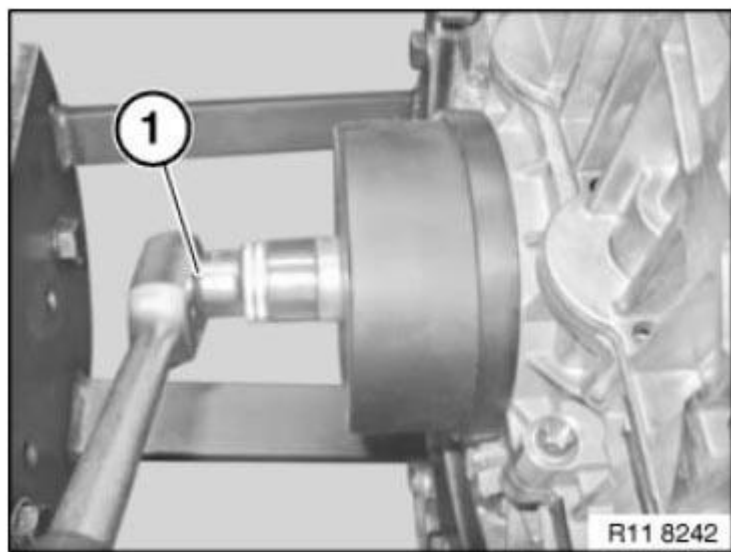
Screwing On Radial Shaft Seal Using Special Tool 11 9 183
